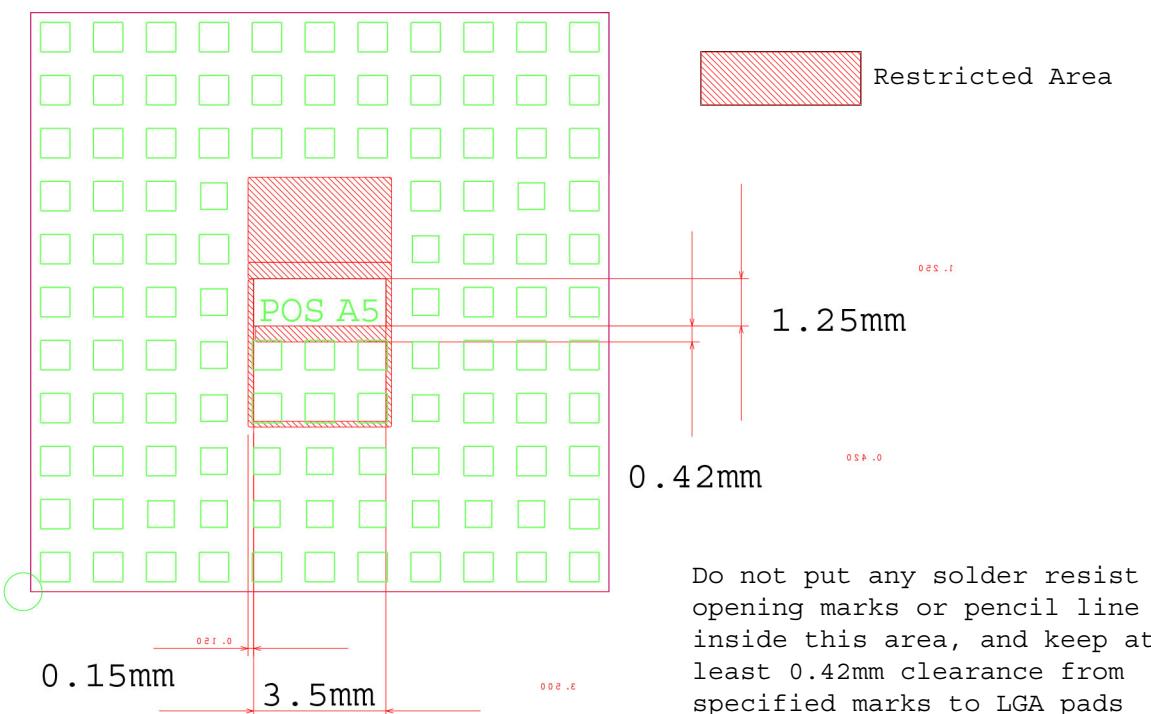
Dimensions of area for possible markings TX62-W (bottom view)
